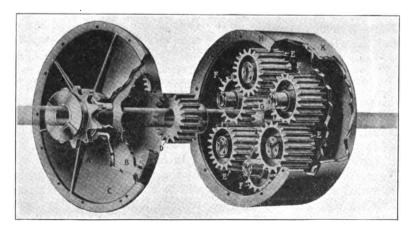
GEAR CASE SHOWING GEARS OF PLANETARY TRANSMISSION
